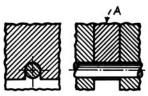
When swinging member A is to be removable, the bearing is cut as in the left view.
